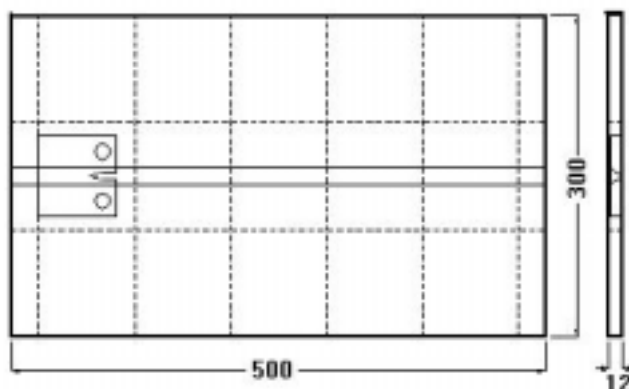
Scheme of retired of specimens for fatigue crack propagation tests. 12 mm thickness welded joints. The welds were started at the left of the figure
